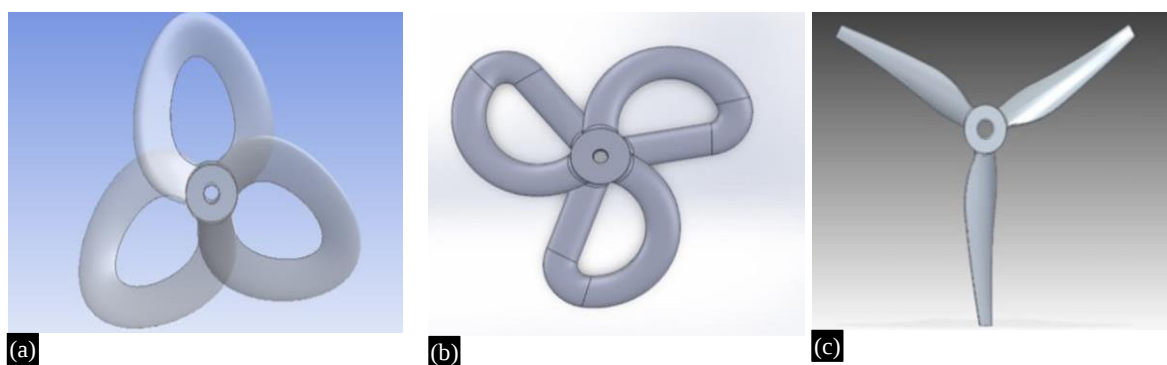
CAD model of (a) Aero propeller (b) Sharrow propeller and (c) Traditional propeller.
